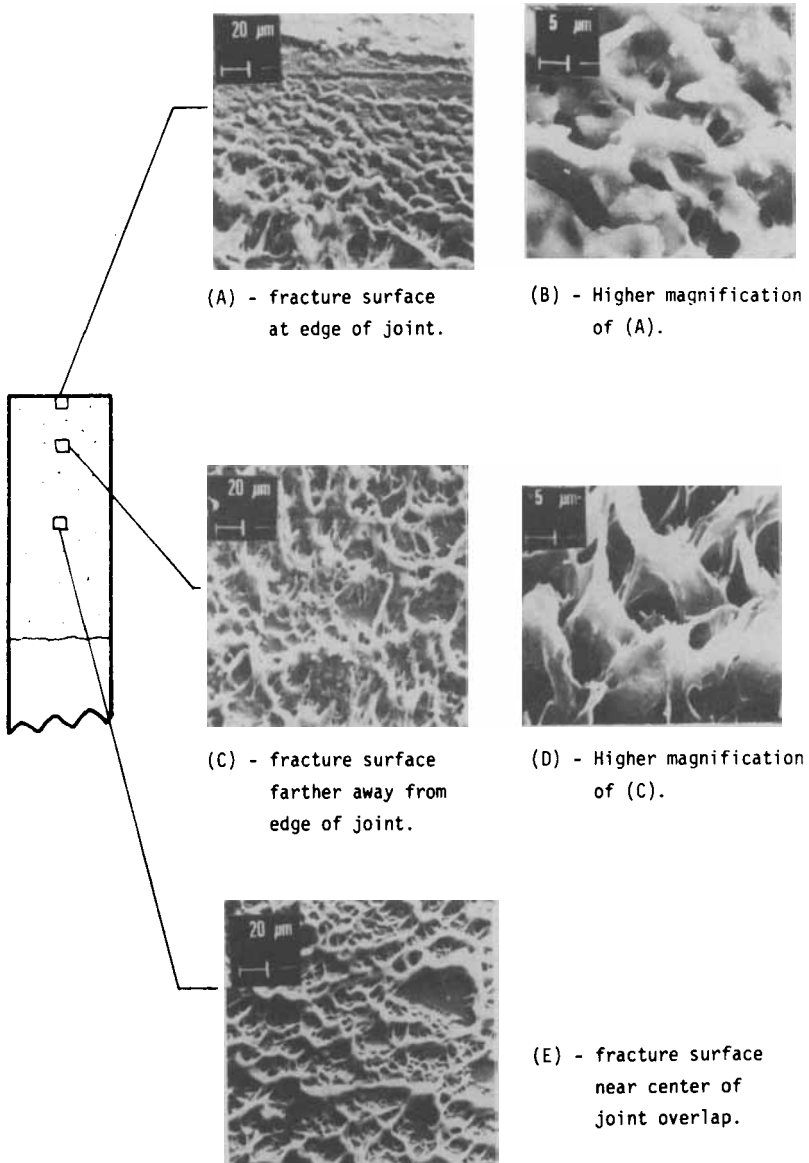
Typical fractographs along the failure surface of a double-lap specimen with 35 mm overlap.
